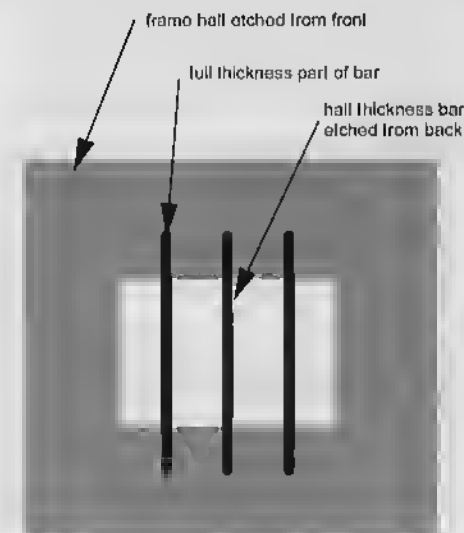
B CAD etching drawings for Fig. 5.23A.
